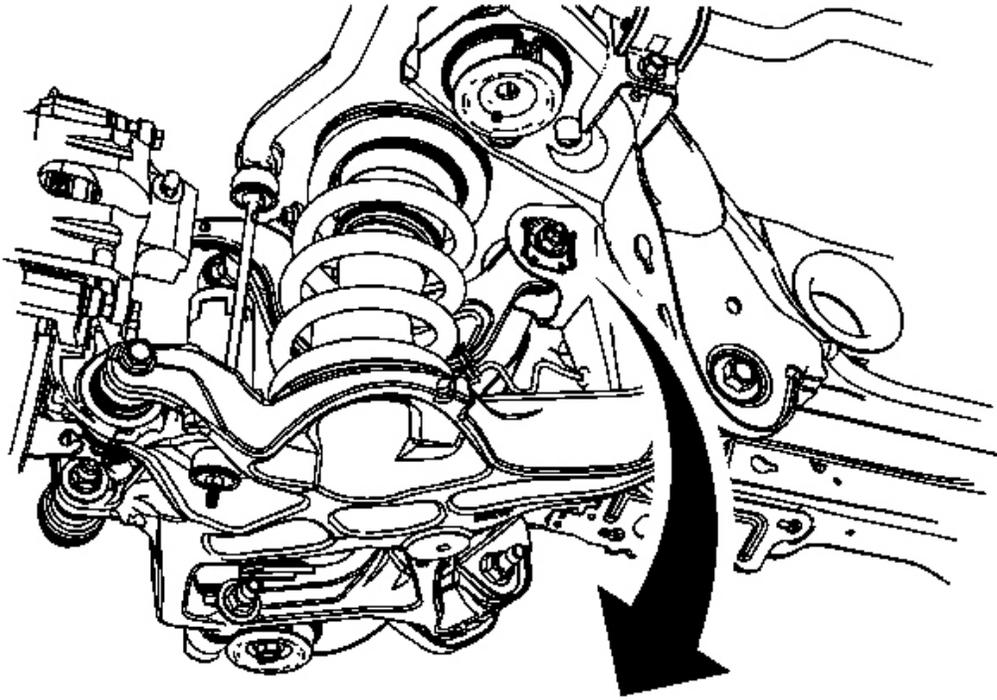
Identifying Adjuster Cam, Cam Nut & Bolt
